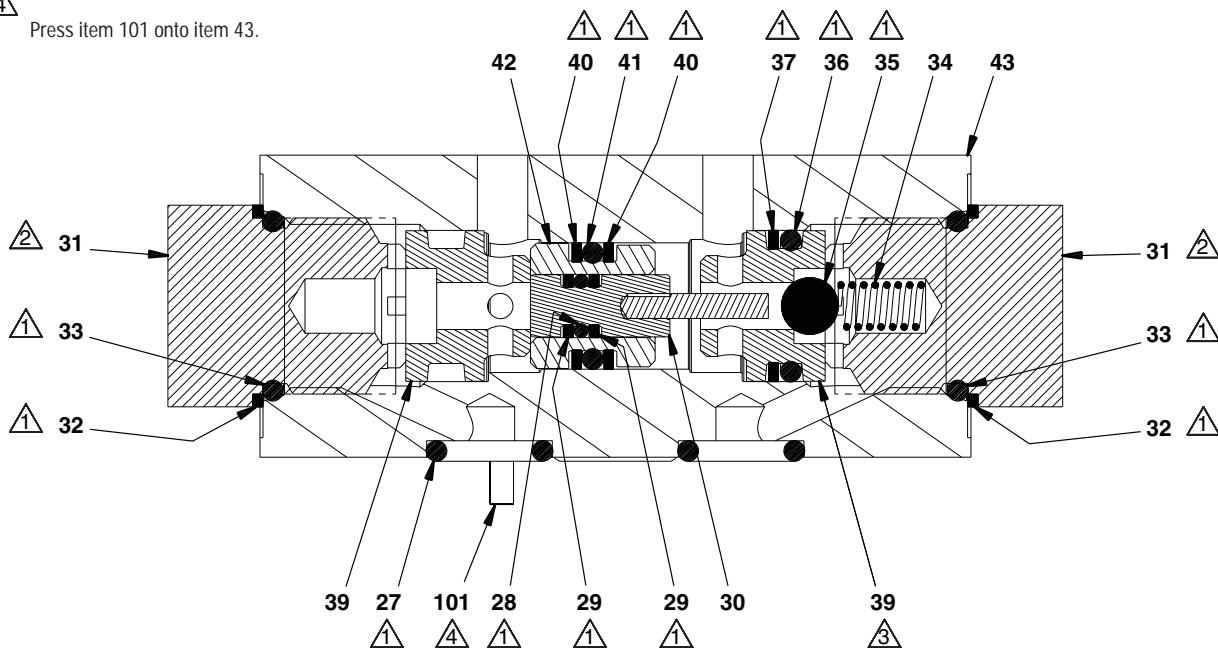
, DC7296950SR Locking Power Seat Assembly (VM43-LPSV)
